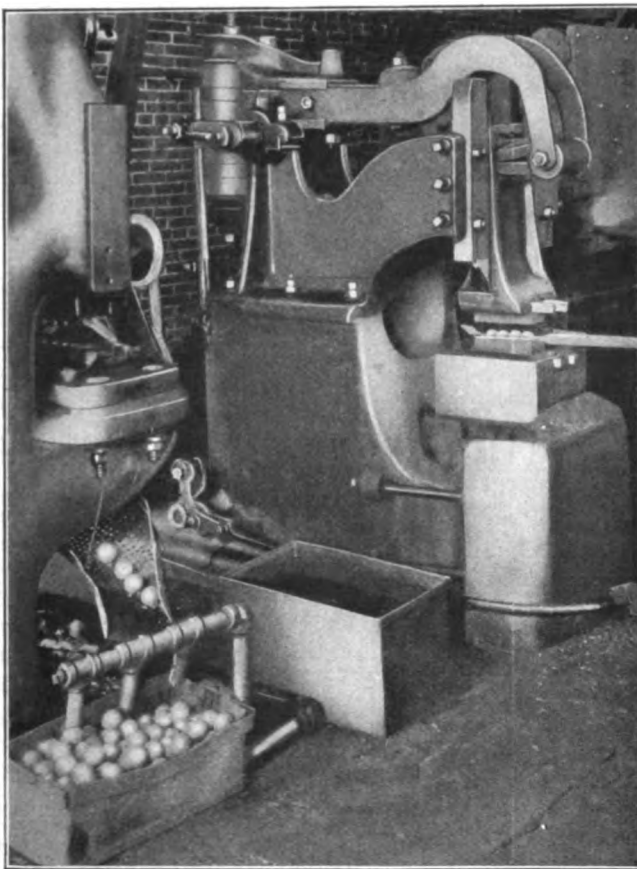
FORGING STEEL BALLS. ALSO SHOWING HOT PRESSED BALLS COMING FROM THE PRESS AND COOLING DEVICE
